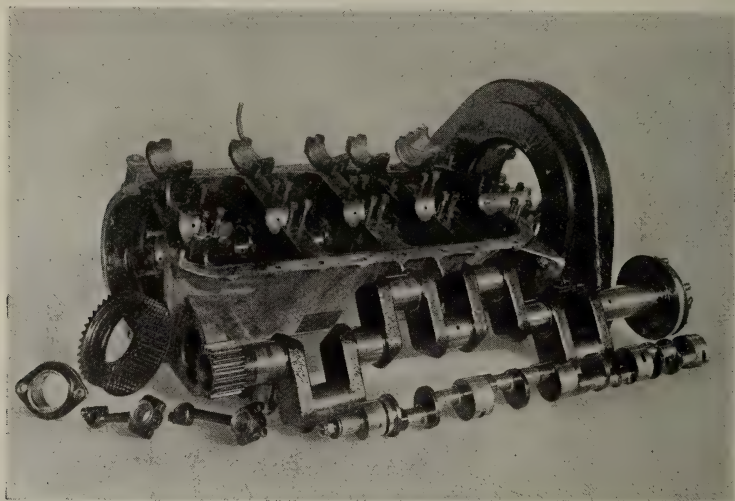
Showing condition of crank and eccentric shafts, bearings, sleeve rods, chain gears, etc., after tests.
